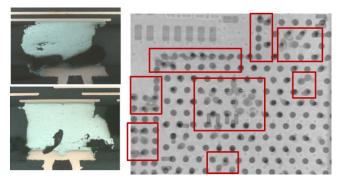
Deformed Solder Joints Found after ATC Testing with Solder Joint Encapsulant Material A
